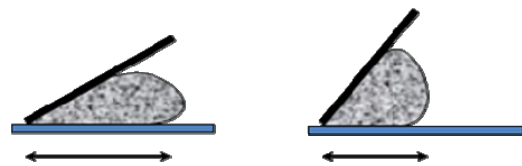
A Lower Angle Results in a Longer Contact Area for a Given Amount of Solder Paste.
